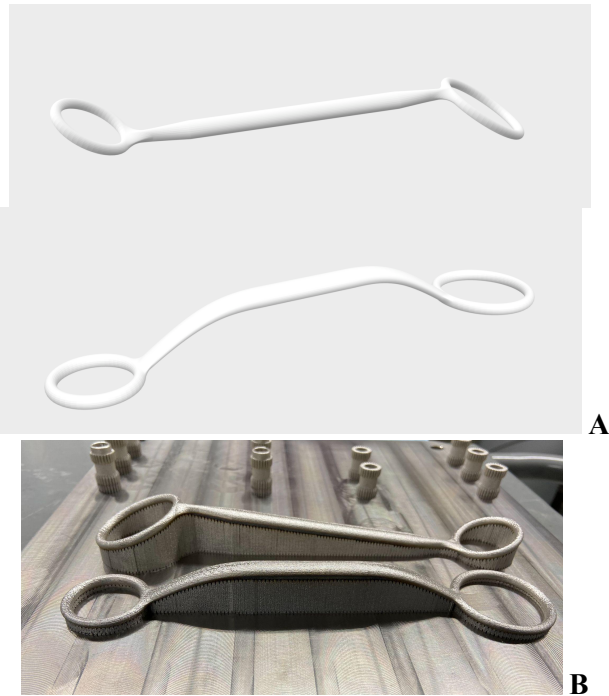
Final Chosen Designs. (a) Final Designs shown in CAD (b) Final designs shown printed in DMLS with supports.
